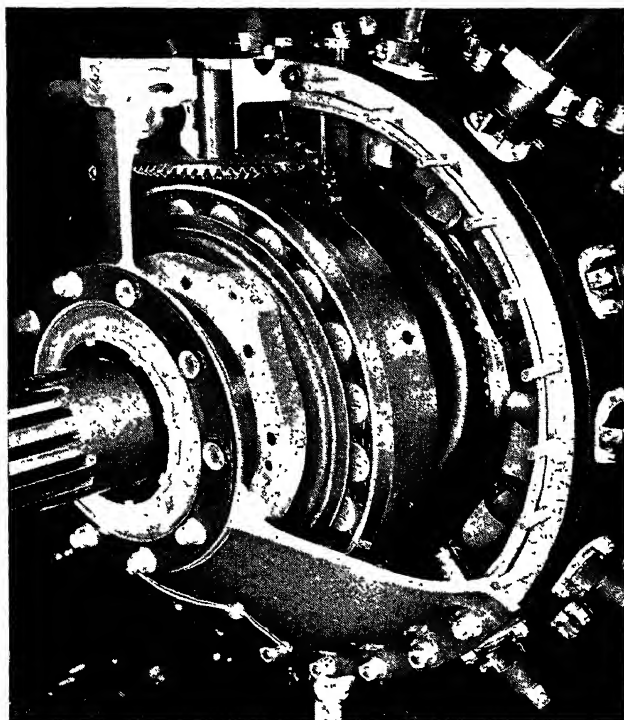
Sectional view of the reduction gear, cam, and tappets of a radial engine. (Wright Aeronautical Corp.)
